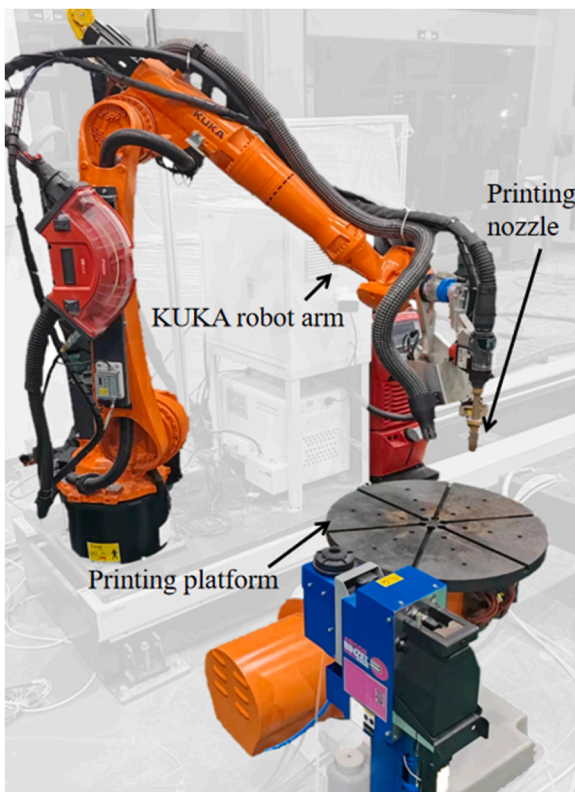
WAAM machine with a KUKA robot arm and a tiltable platform.
